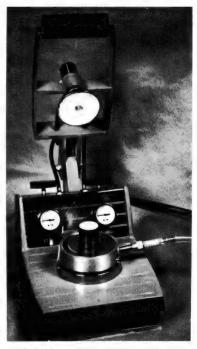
An air-pressure casting machine with the ring in position. The gold alloy is melted directly in the crucible formed in the investment. Above the ring can be seen the piston through which the air pressure is applied to force the molten alloy into the mold. The table below the ring may be connected to a source of vacuum, which is activated just before the pressure starts. (From Phillips, RW: Skinner's Science of Dental Materials. 8th ed. Philadelphia, W. B. Saunders Company, 1982, p. 434.)
